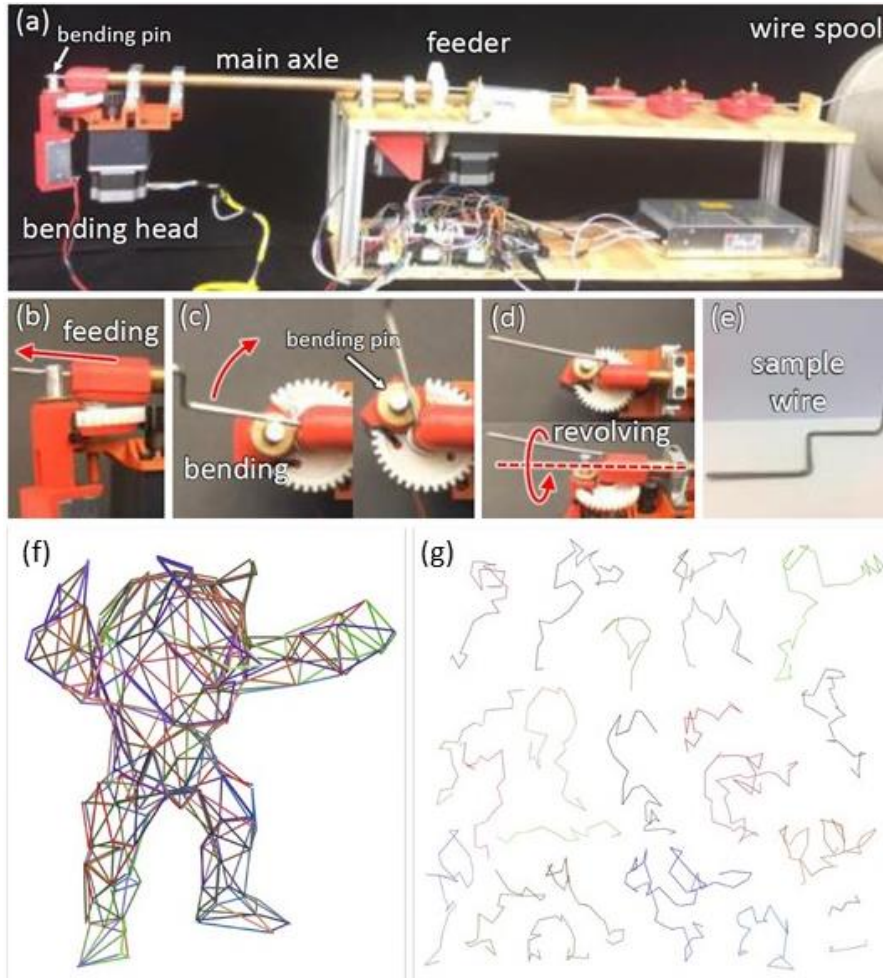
Eulerian wire for sculptures, (a)-(e) Process demonstrated by Lyra et al. [70] for making a fabricable wire part. Bending a 3D structure from a bending machine. (f) and (g) shows the ARMADILLO model digitally manufactured by fabricable sub-parts.
